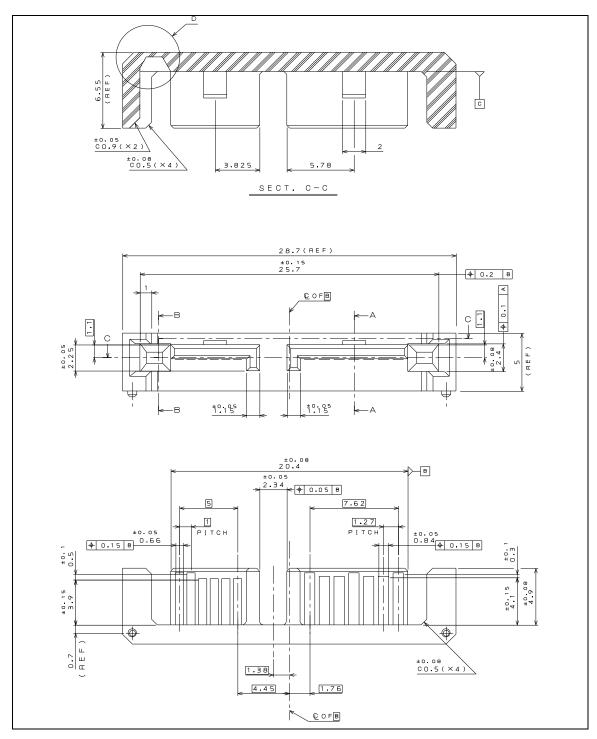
7.0 mm Slimline device plug connector interface dimensions
